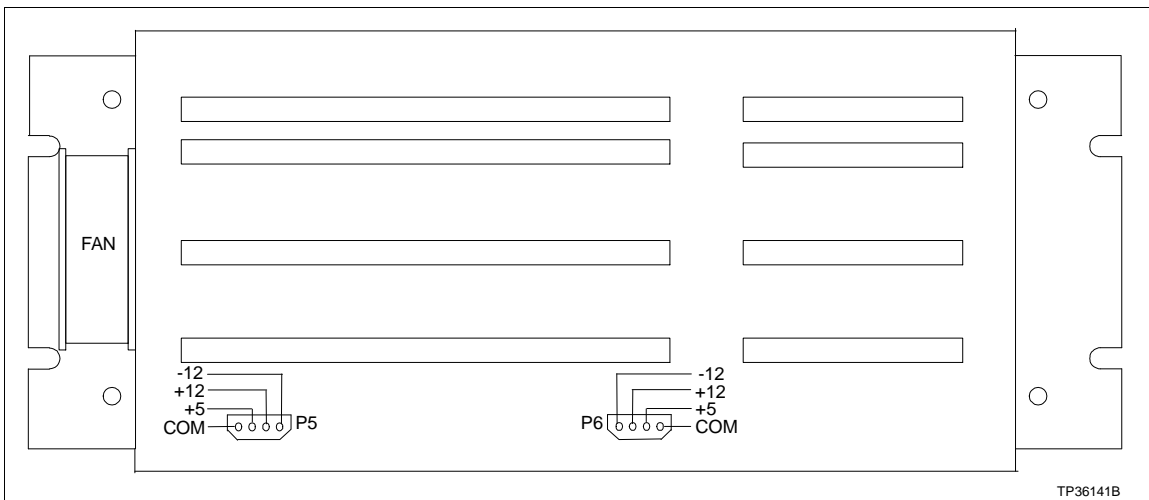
IIOIS43 Multibus Card Cage (Rear View)
